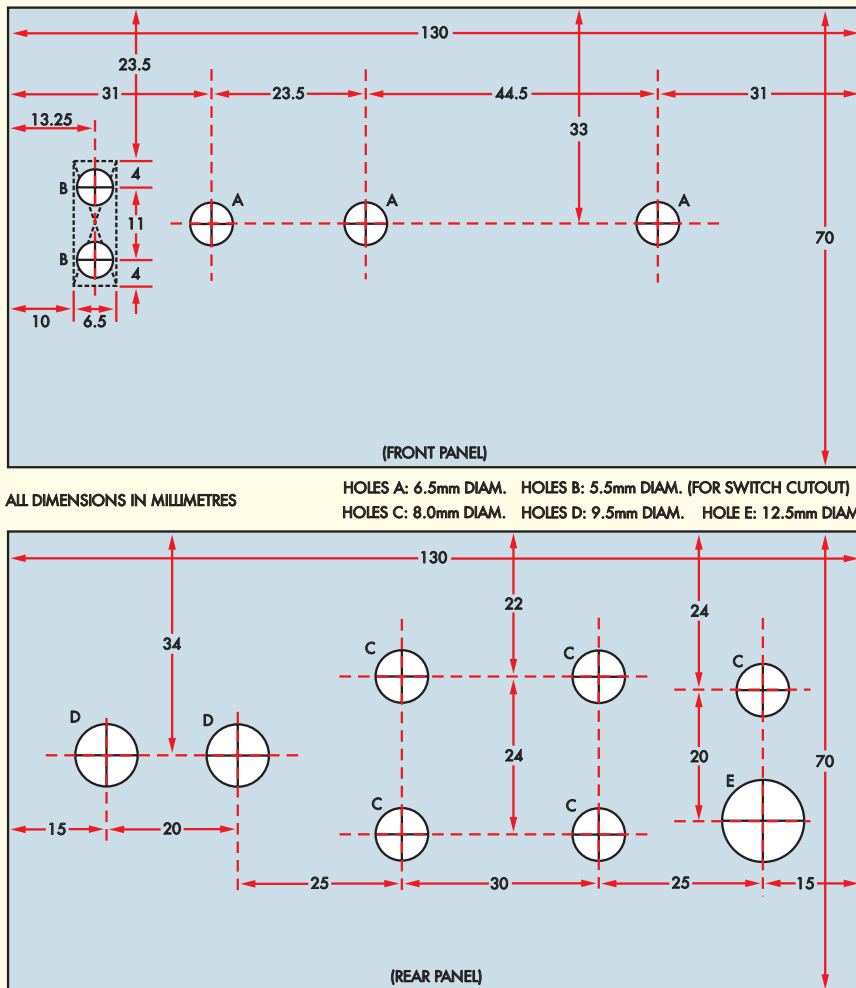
full-size drilling templates for the front and rear panels. Centre-punch each hole position and drill small pilot holes before carefully enlarging them to size using progressively larger drills and a tapered reamer.
